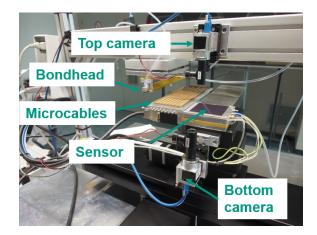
The in-house developed bonder machine currently under construction. It is designed specifically to handle the STS detector modules and will be used for a fully automated sensor-cable interconnection process.
